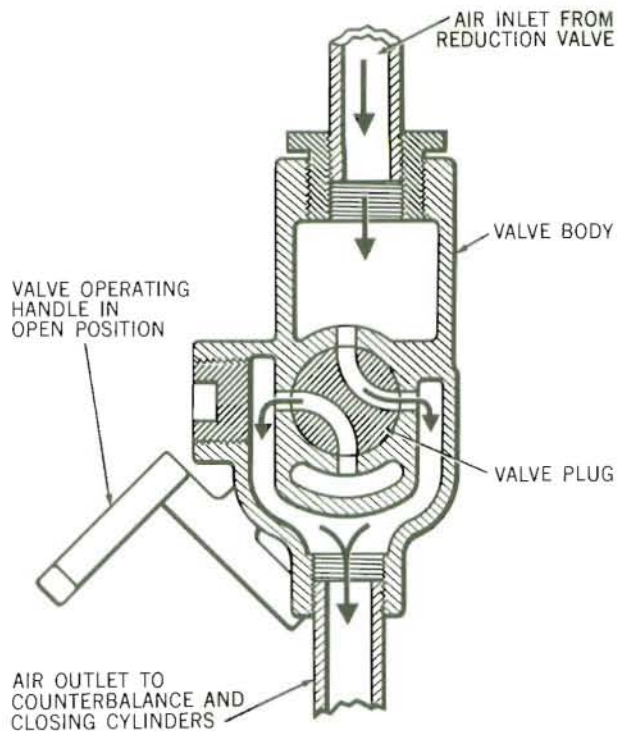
Breech-closing Cylinder Valve, Sectional View
